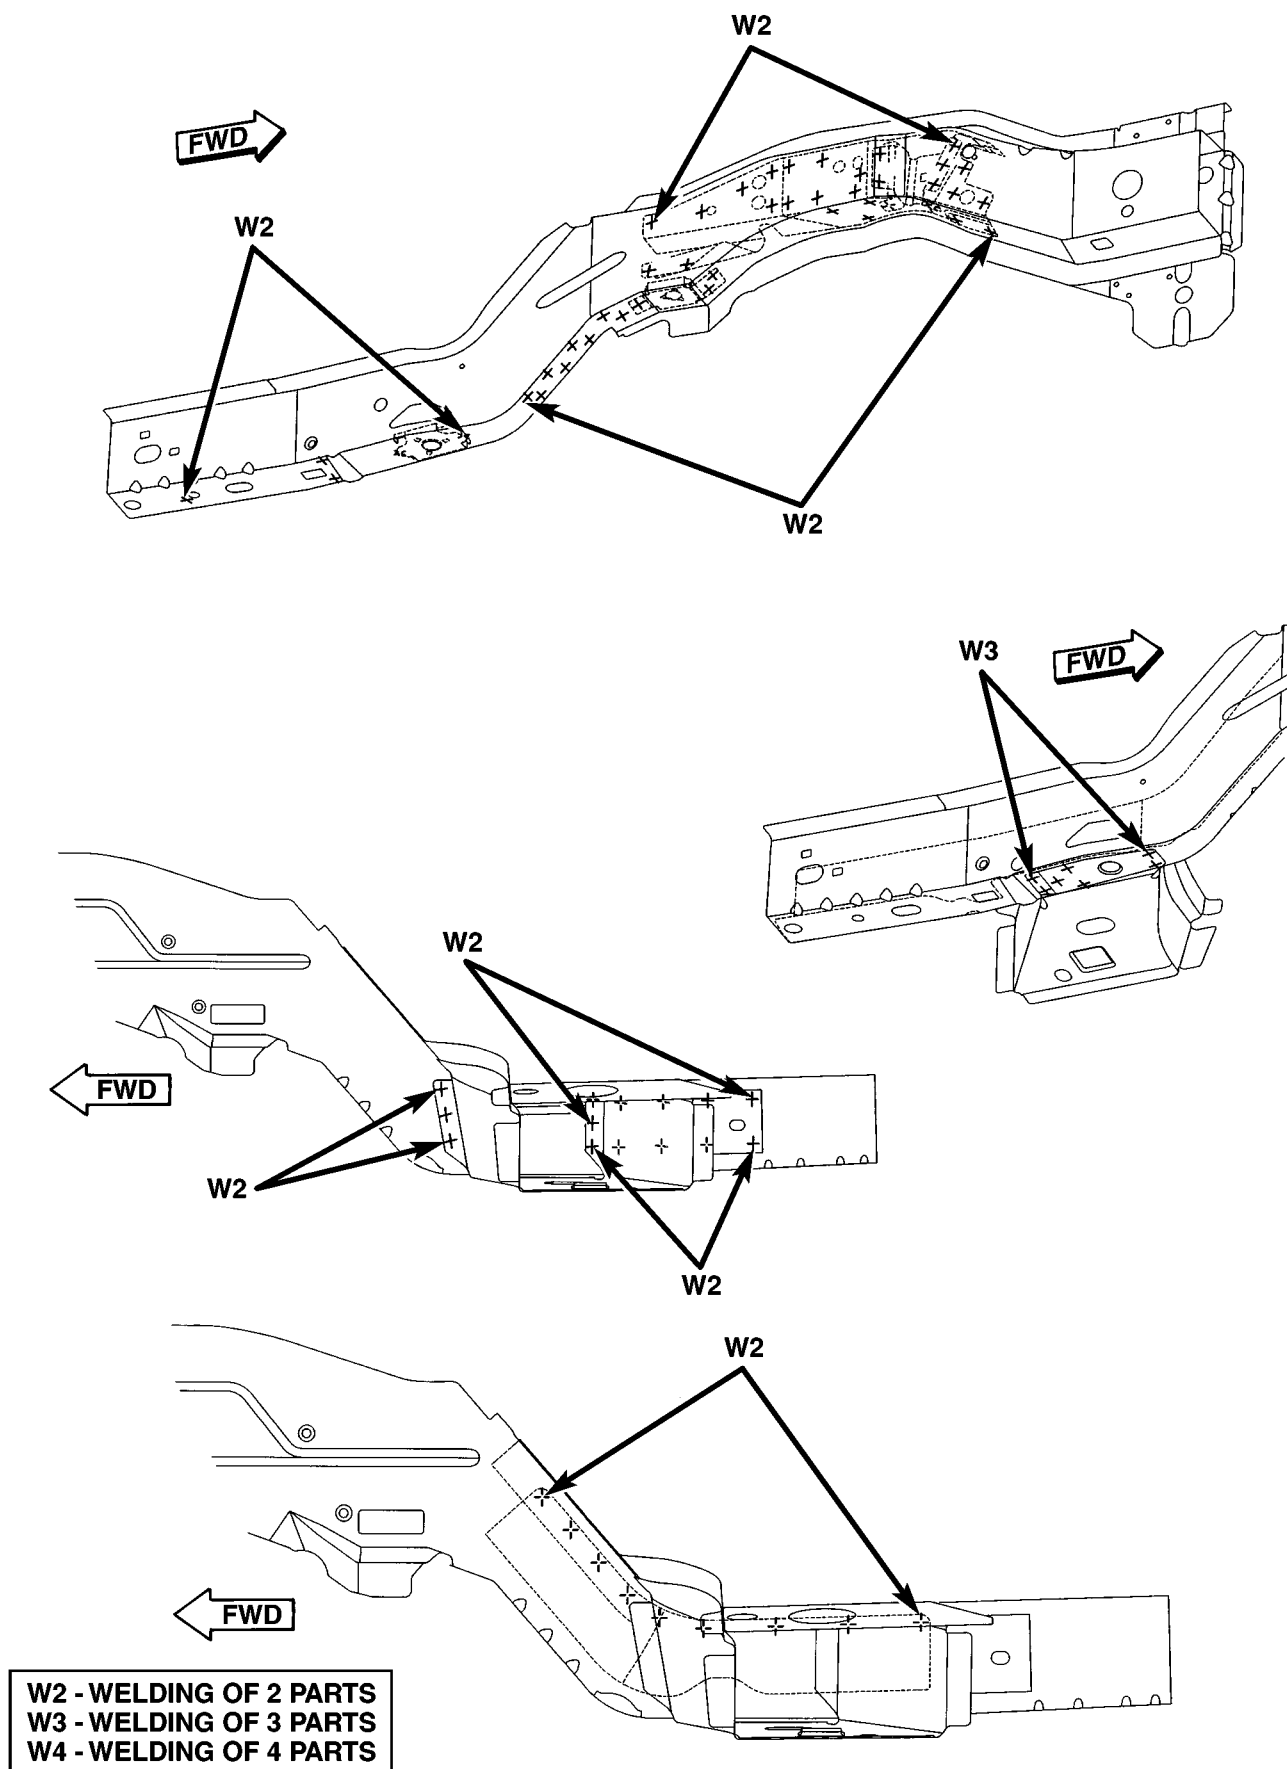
STRUT TOWER AND REINFORCEMENTS - LEFT
